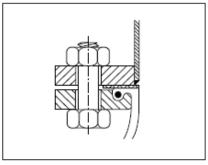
Flange provided with flat sealing gasket to protect the rubber surface.
